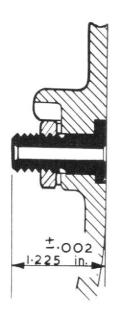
Section through diffuser casing showing dimensions for impeller tip clearance unions.
